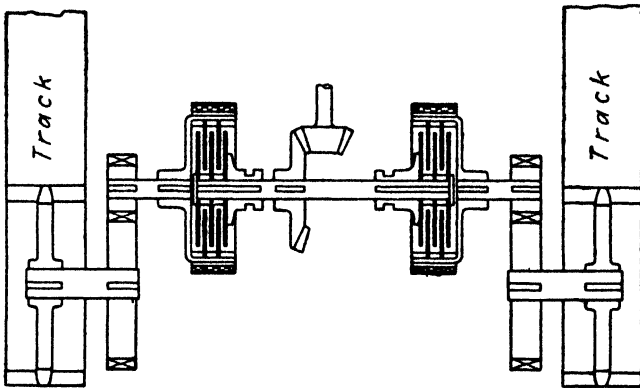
DIAGRAM OF A "CLUTCH-BRAKE" STEERING GEAR FOR TRACK-LAYERS.
